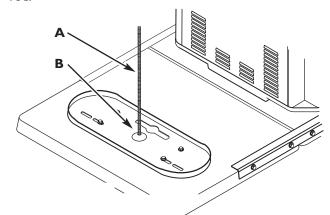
Attach Tank Hold-Down Rod to LP Tank Tray
